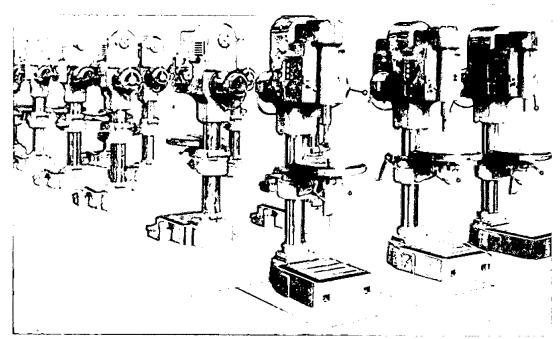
Hungary: Drilling Machine (Upright, Round-Column Type)
